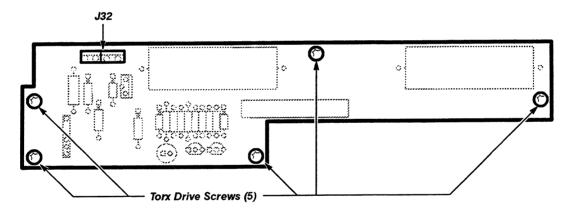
Removing/Replacing the A25 Degauss Board
